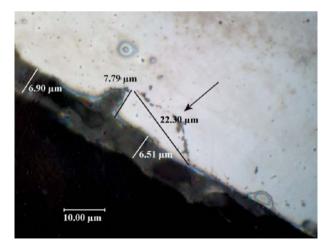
Fretting crack developed from a grinding defect on a crankshaft shoulder
